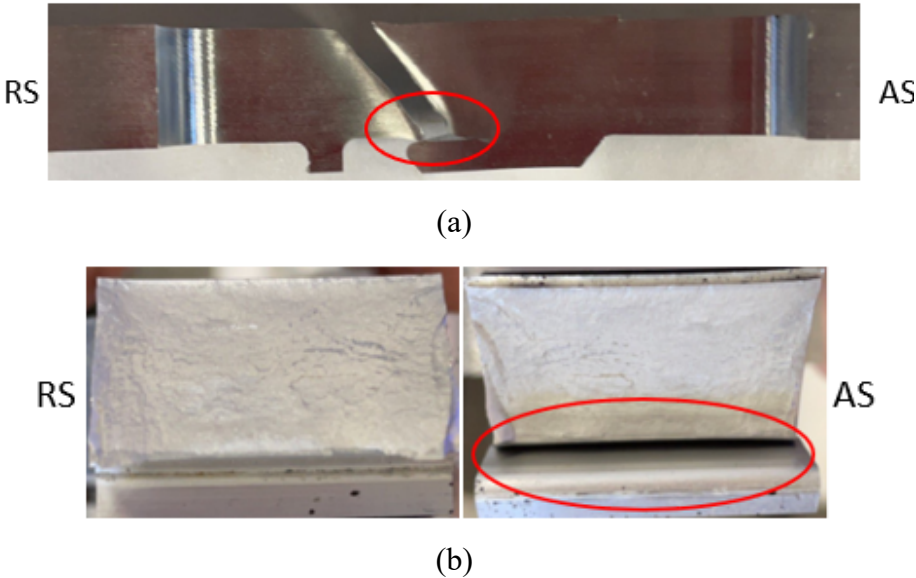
Macro fracture images of 16mm 2Gap specimen, transverse image of fracture (a), image of fracture surface (b). Area marked in red indicates sign of incomplete bonding.
